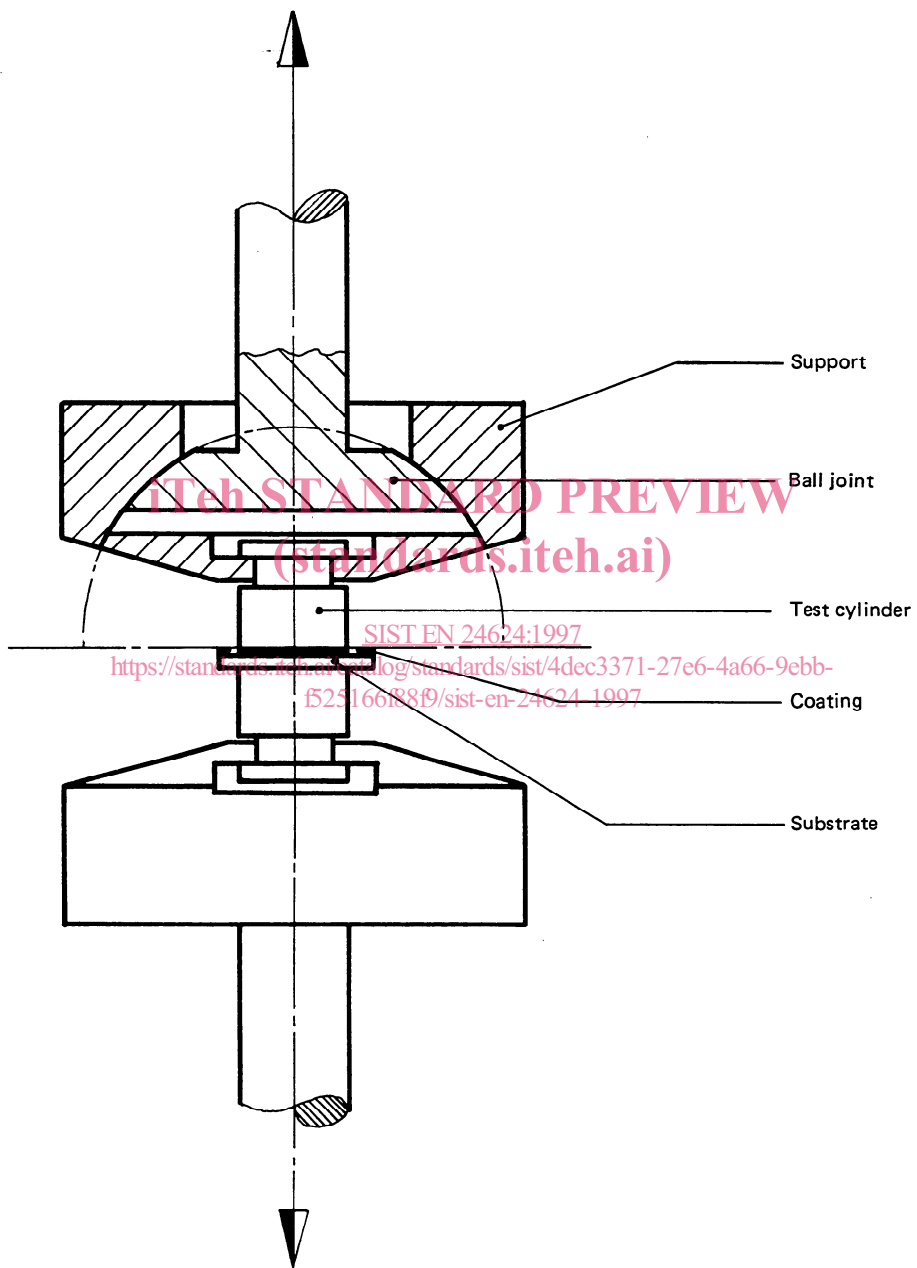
Example of a suitable test apparatus for methods specified in 7.3.1 and 7.3.3
